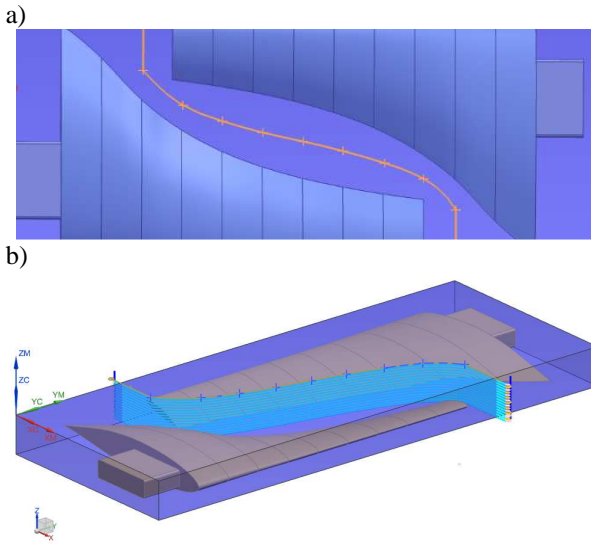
Processes for cutting the proton billet. a) Assemble and sketch, b) Simulation paths for cutting.
